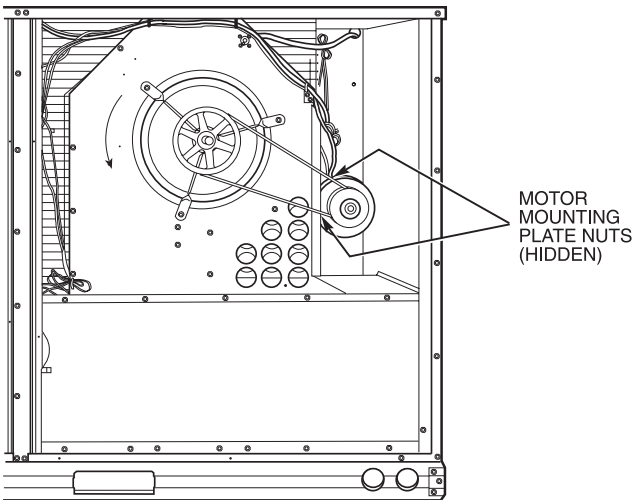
Typical Belt-Drive Motor Mounting for Sizes 012,014
